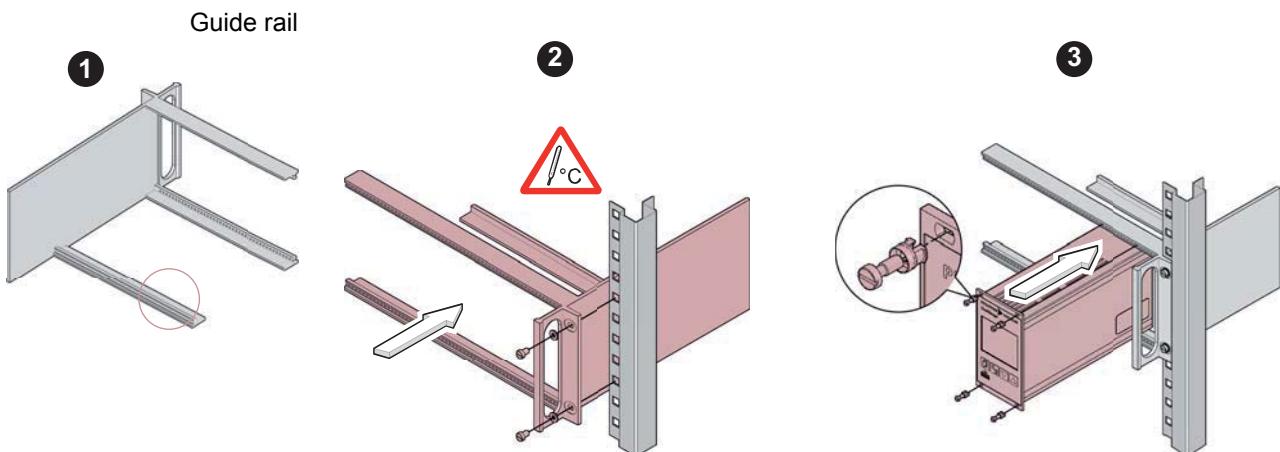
Mounting the TPG 36x into the rack frame using a rack chassis adapter
